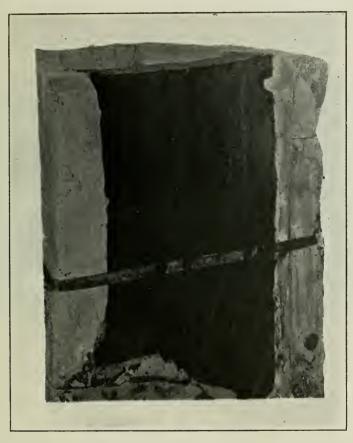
Split side mold. Upper right hand corner shows projection for making water bar slot. Note the split in the mold 2 or 3 inches below the projection.
